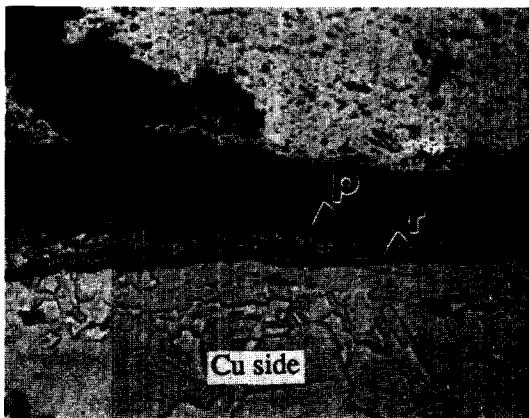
Fractography of friction welded joints for Al/Cu (C-5)
